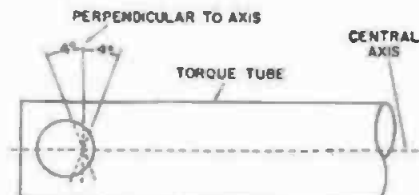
B. Torque tube of Westrex stereophonic cutting head showing the alignment of the recording stylus.
